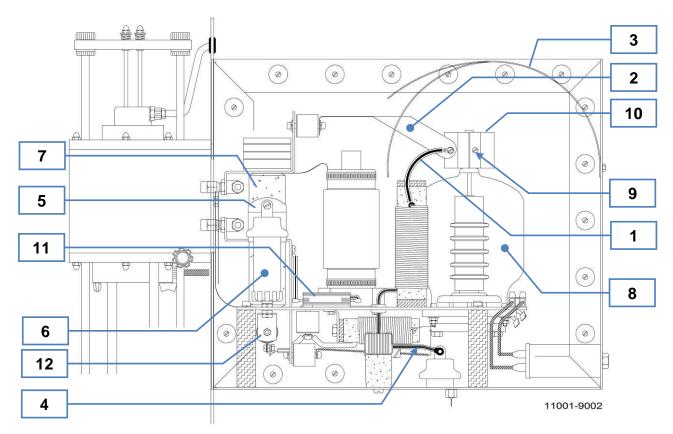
Draft 11001-9002 (1-15-3-1S)
